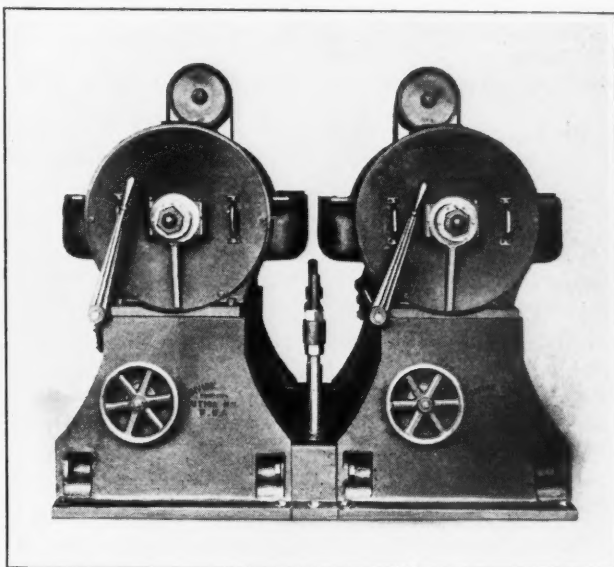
Double-wheel Machine for Polishing Strip Brass Fed from a Roll
